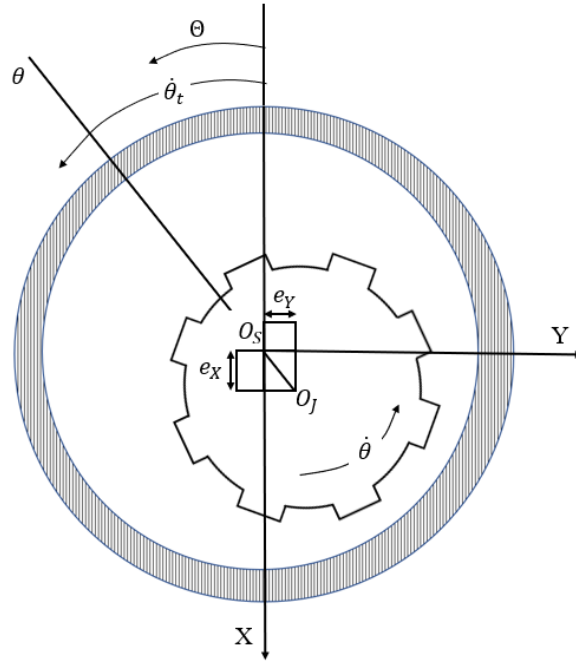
Schematic of the grooved journal (rotor) inside of a sleeve (chassis) with key coordinate system components identified.
